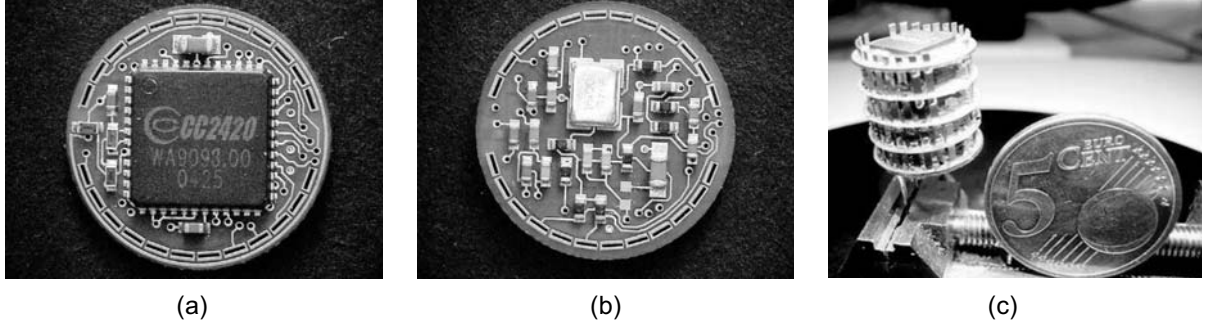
Photographs of (a) top view of the transceiver layer, (b) bottom view of the transceiver layer and (c) the manufactured prototype sensor
